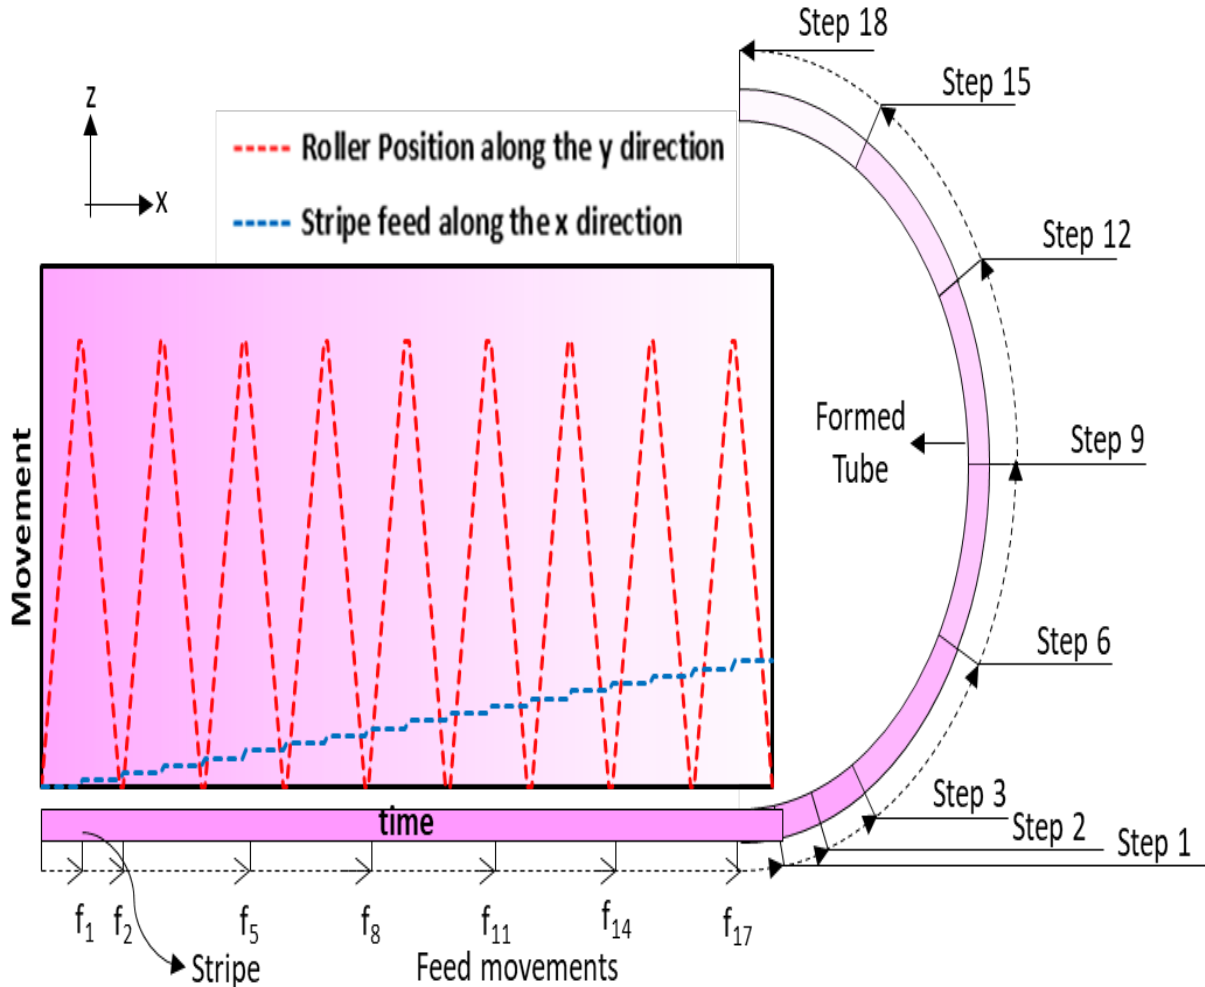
Toolpath and feed movement in agile flexible roll forming process.
